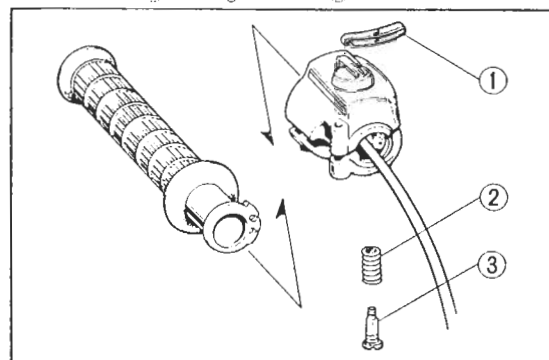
(1) Throttle grip adjuster (2) Spring (3) Adjusting bolt
